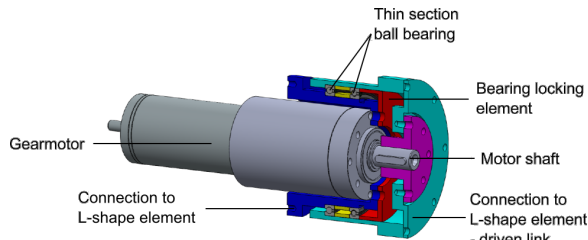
Internal view of the shoulder and elbow joint (Joints 2 and 3)
